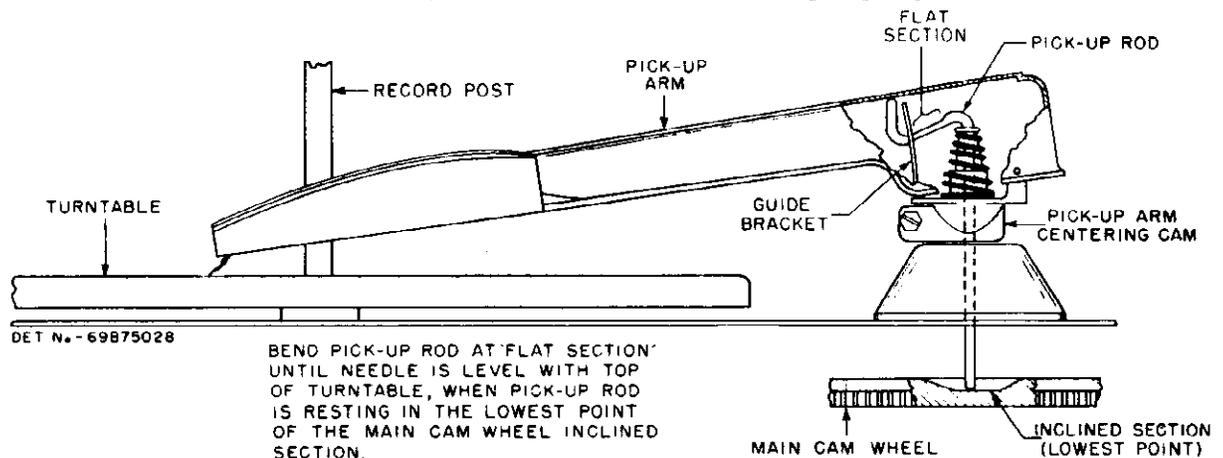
PICK-UP ARM VERTICAL ADJUSTMENT DETAIL
